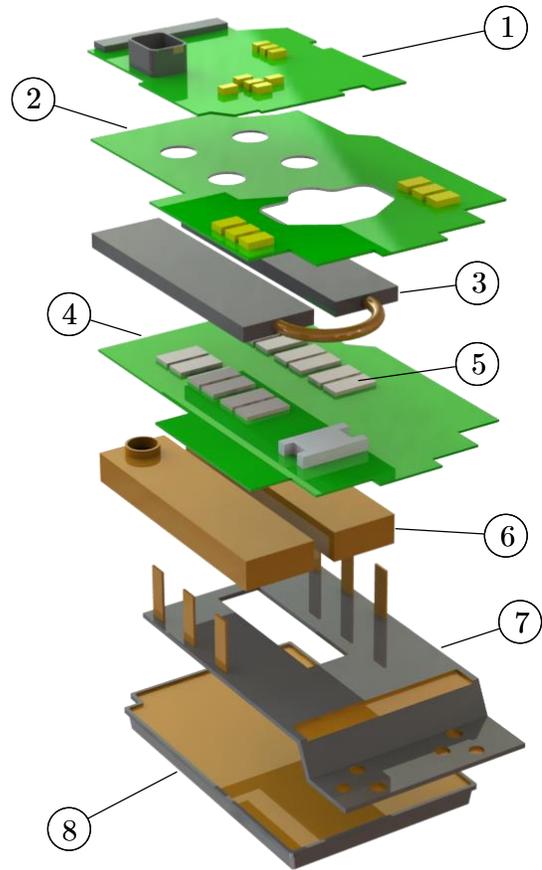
Second generation Chevrolet Volt inverter components [46]: 1) Control board 2) Gate driver board 3) Top heat sink 4) Power board 5) DSC IGBT modules 6) Bottom heat sink 7) Phase busbars 8) DC-link capacitor.
